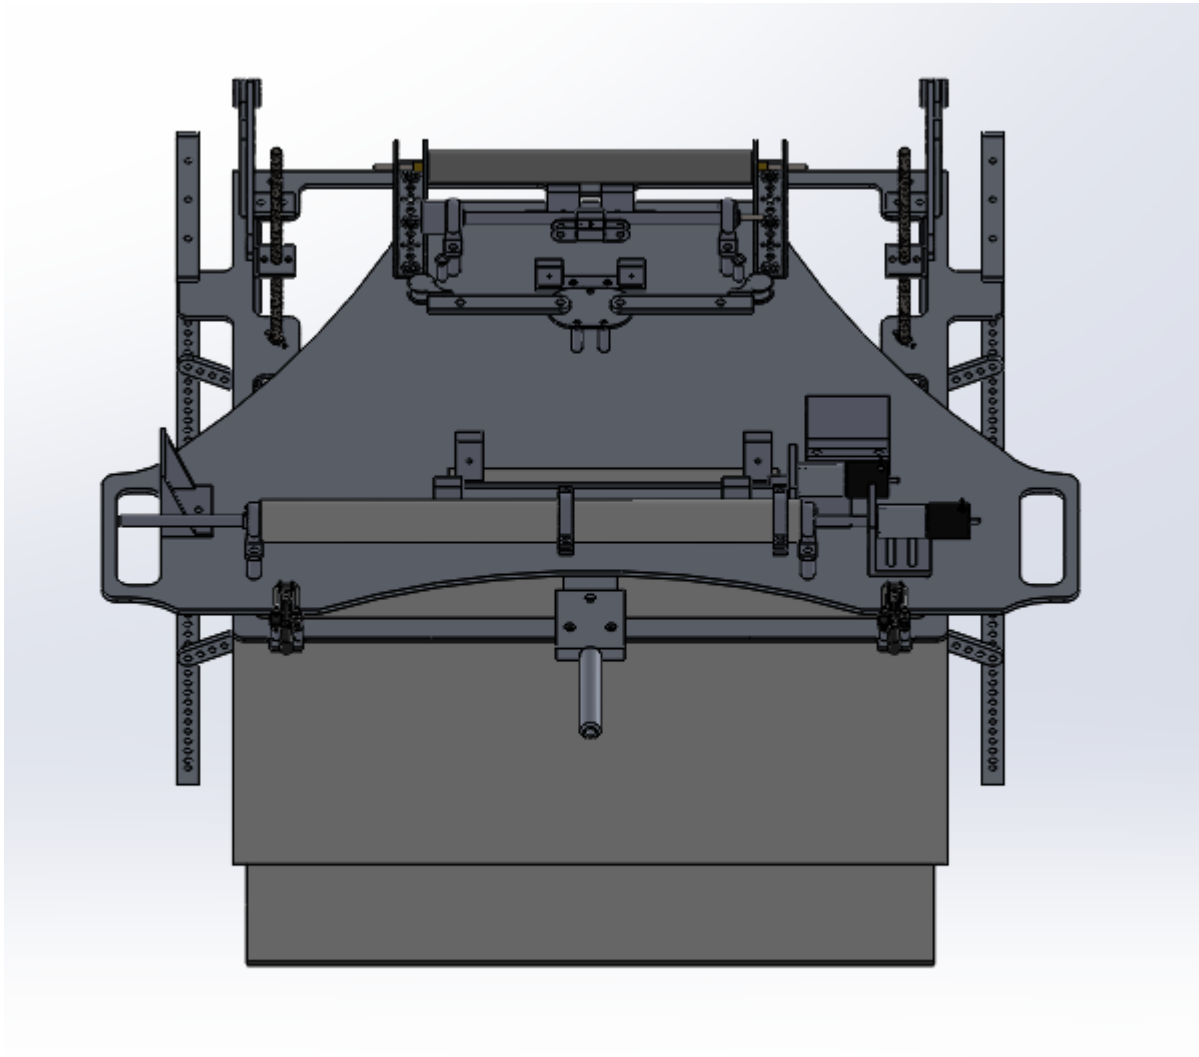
Front view of the winch plate CAD model, with winch and accoutrements.
